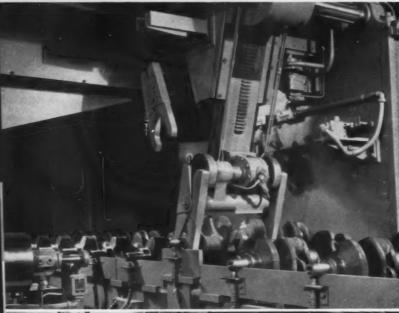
Crankshaft is elevated at the loading station in line with the No. 1 lathe. Fingers on an extended loading arm grip the shaft on main bearing surfaces Nos. 1 and 4.
